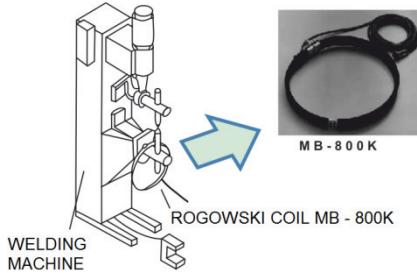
Spot welding machine with the Rogowski coil, type MB-800 K [4]
